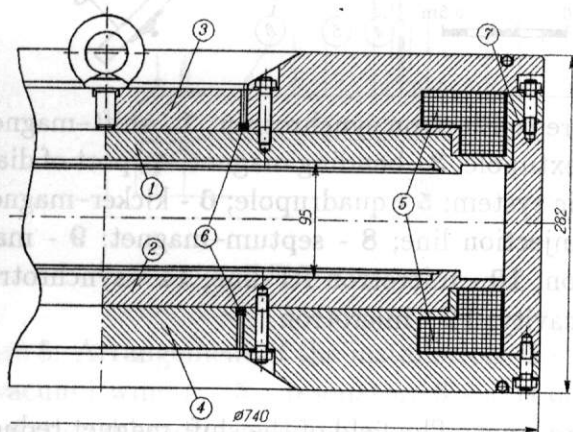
Microtron magnetic-vacuum system. 1 - upper pole; 2 - lower pole; 3 - upper cover; 4 - lower cover; 5 - main winding; 6 - correction winding; 7 - indium vacuum sealing;
